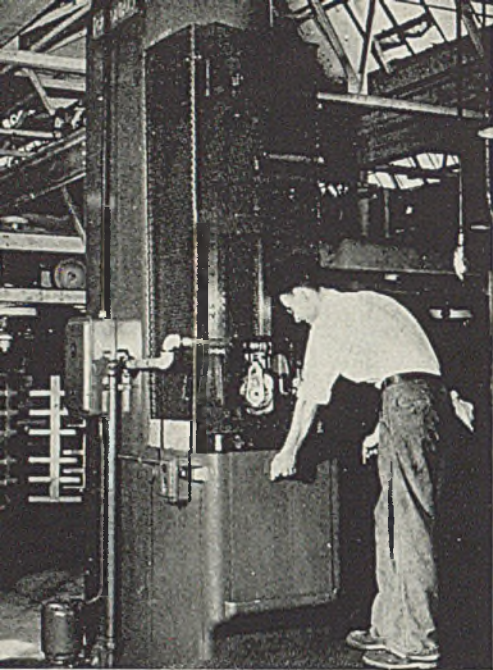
A 10-ton 42-inch stroke press used at Continental Motors Co., Detroit, for machining the flats on flanges of cylinder barrels of the 9-cylinder 400-horsepower radial engine used in military tanks and training planes
